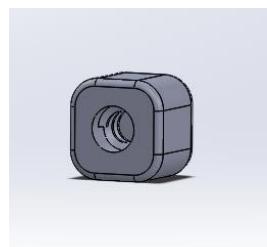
3D drawing of connecting components of the tip of 1st prototype
